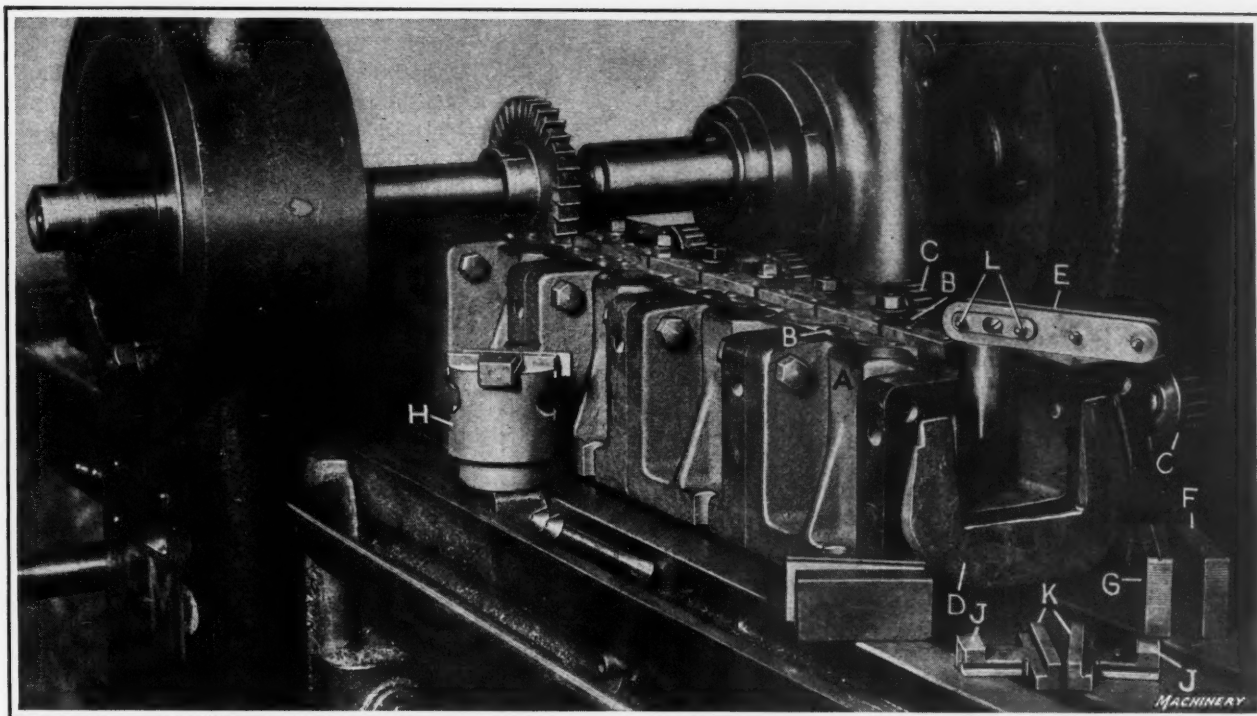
String Milling Fixture in which the Bodies are held while the Jaw Gashes are being milled
